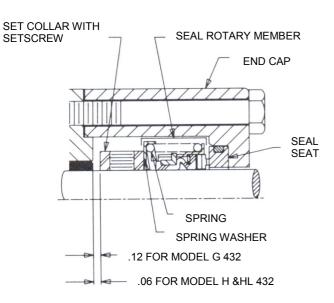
SECTIONAL VIEW, SEAL AREA
